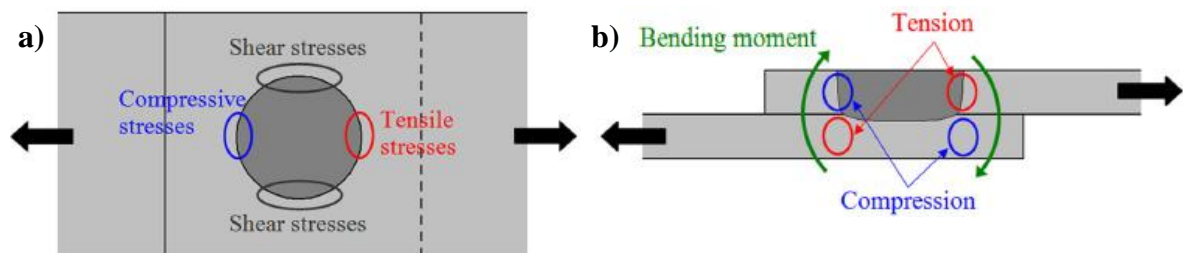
a) Schematic drawing of the stress distribution on a plane parallel to the sheet surface for a spot welded joint under shear tensile loading. b) Schematic drawing of the stress distribution on the longitudinal cross section of a spot welded joint under shear tensile loading (Rosendo et al. 2015).
